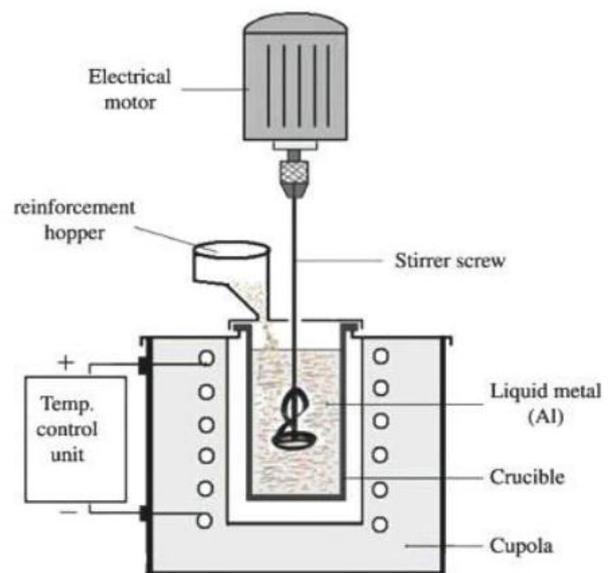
Schematic view of stirring mechanism for the fabrication of MMC.
